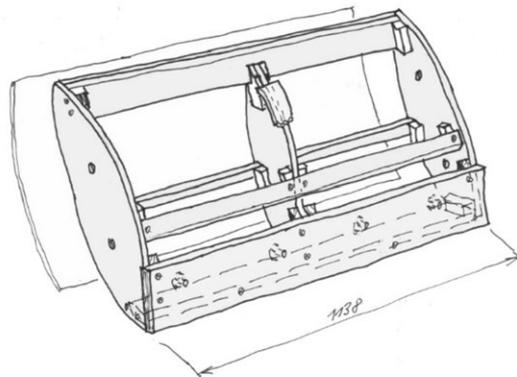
Supporting frame, assembling unit [B]: Backrest.
